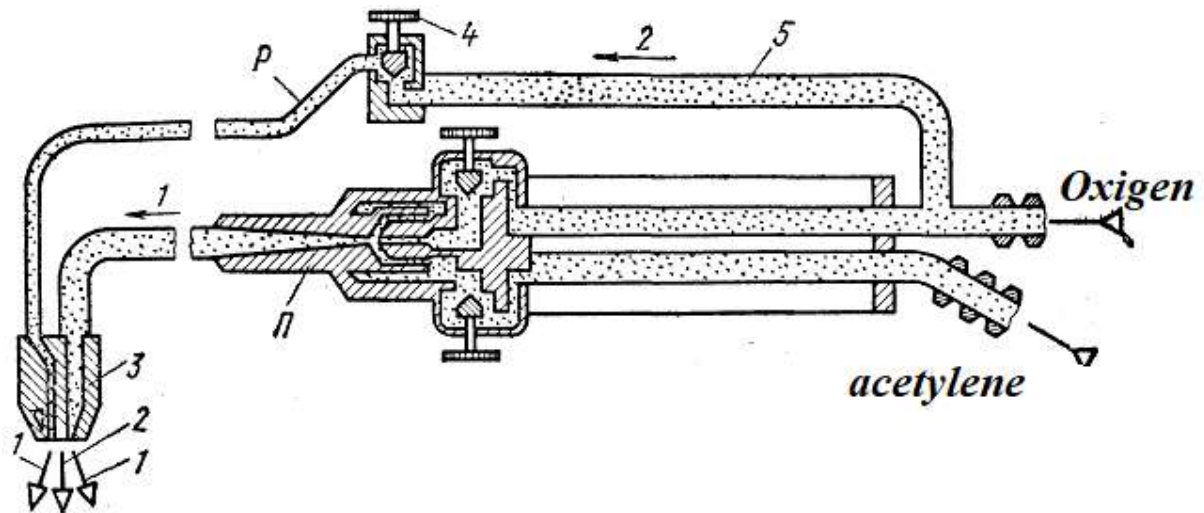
Scheme of an oxygen-oxygen cutter: *P* - cutting part; *II* - heating part
